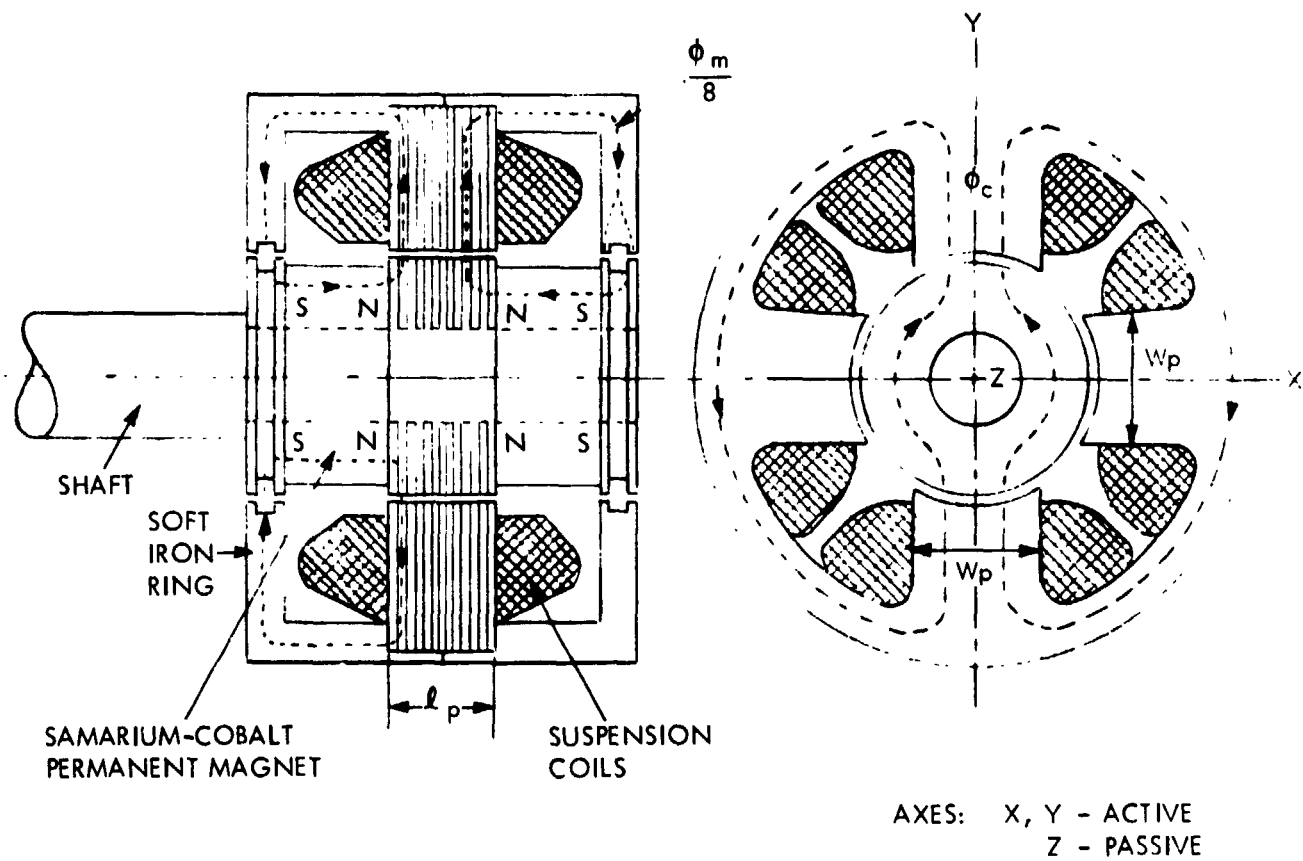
Active Radial and Passive Axial Magnetic Journal Bearing
